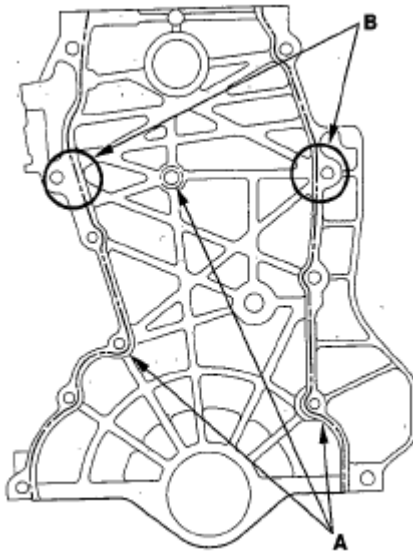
Locating Engine Block Upper Surface Contact Areas On Chain Case
